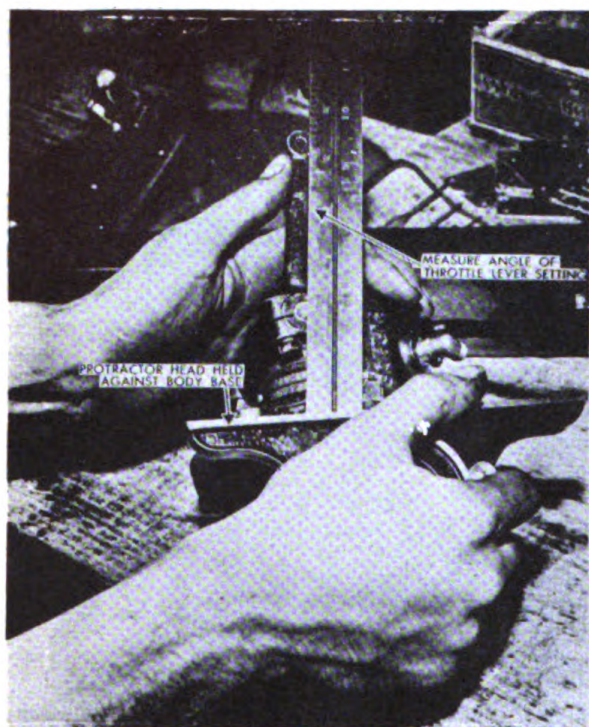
Taking Protractor Reading of Throttle Lever Angle
